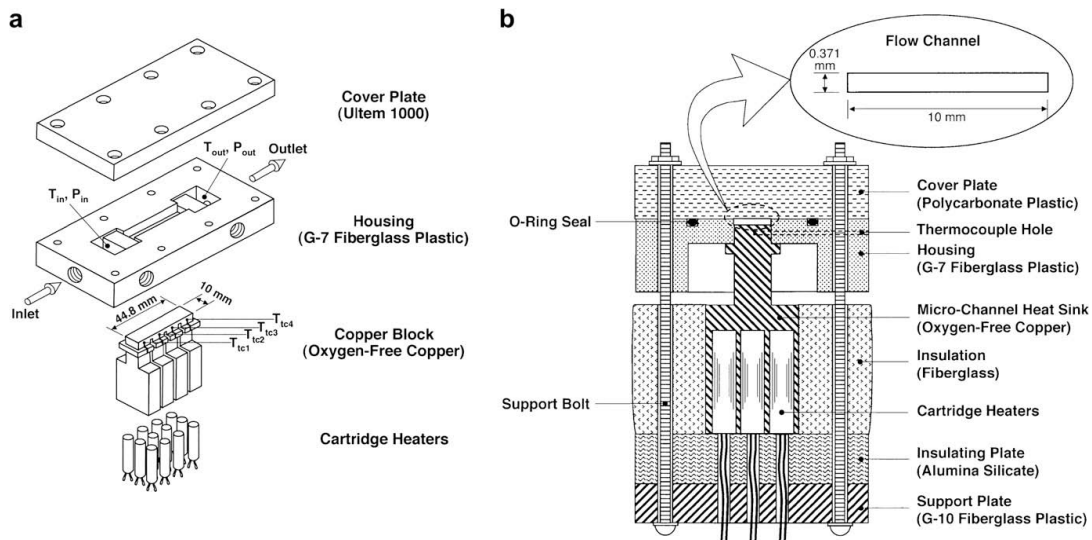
(a) Main components and (b) sectional assembly view of the test module [86].
